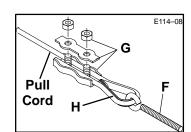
Pull Cord Clamp Assembly and End Fitting Mounting Bracket Eye Bolt Attachment Detail
